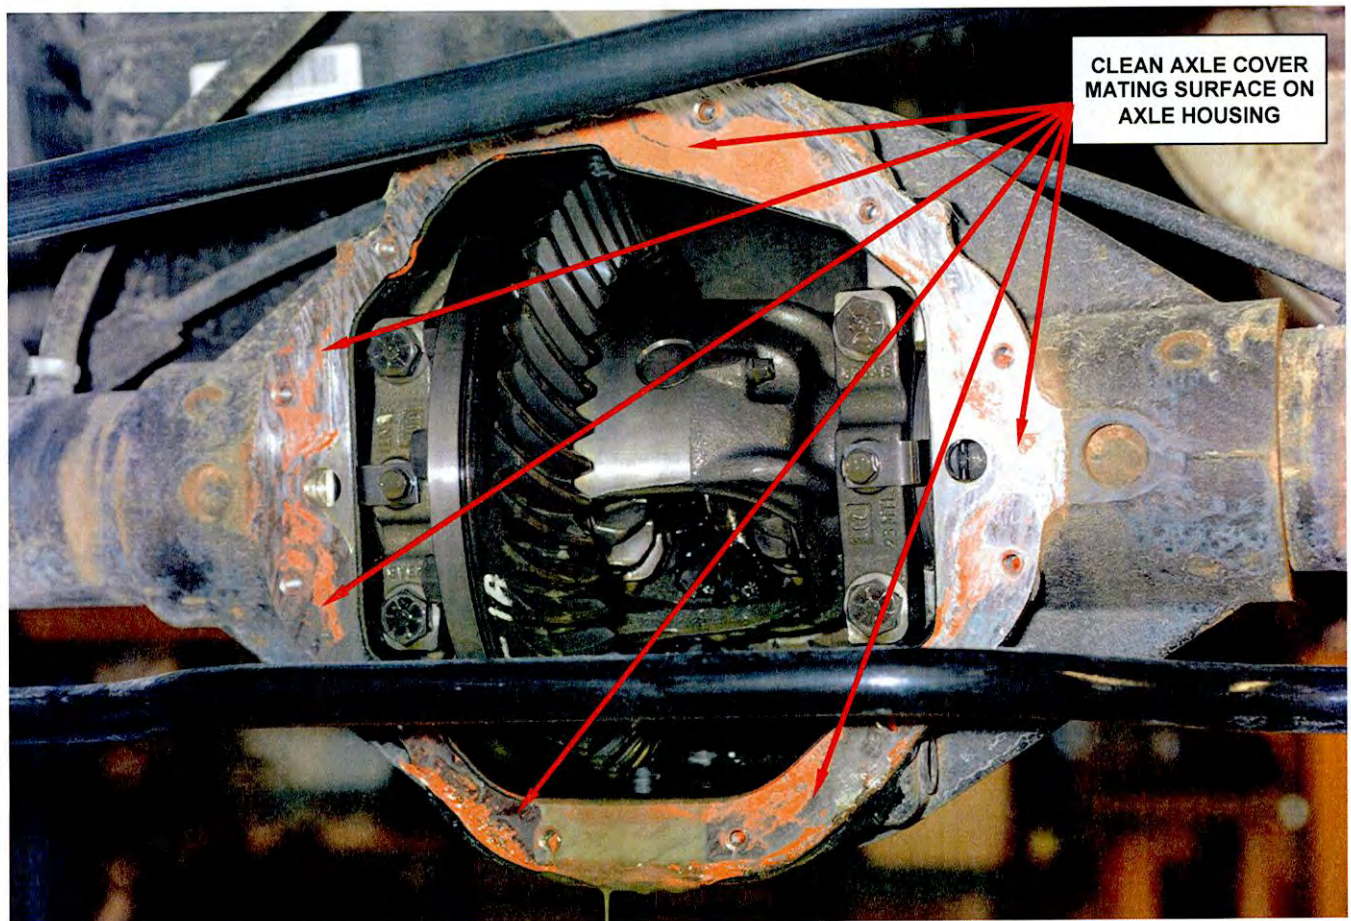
Clean Axle Cover Mating Surface on Axle Housing
